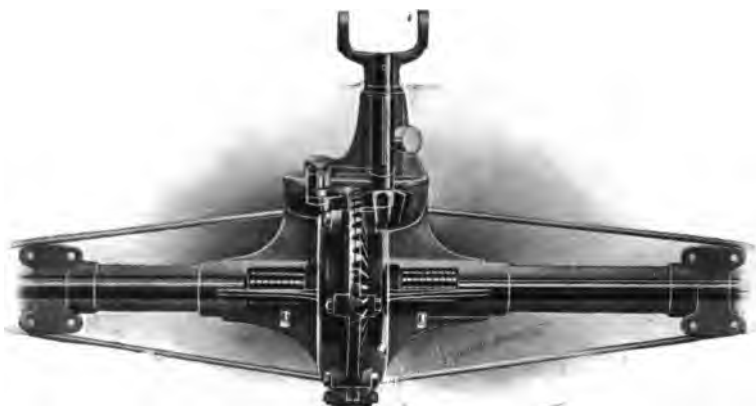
Rear-Axle Construction on Maxwell Car, Showing Roller Thrust to Relieve Strain on Large Driven Bevel Gear of Differential
